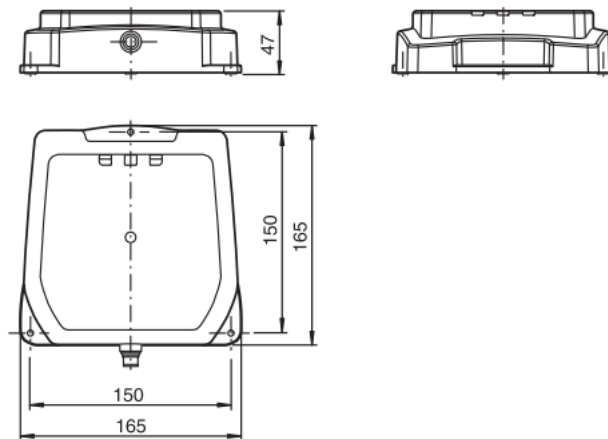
Dimensions of module housing (without host connections, one host connector showed for visualization)
